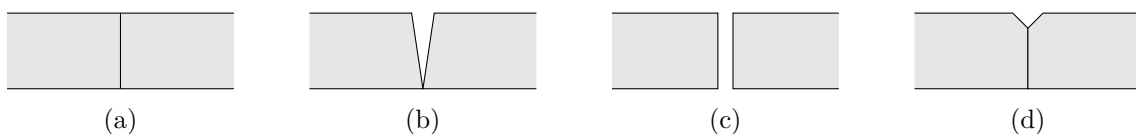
Weld joint setups: (a) butt seam, (b) V-seam with $2 \times 4^\circ$ angle according to ISO 9692-1, (c) butt seam with 0.2 mm gap, and (d) Y-seam
